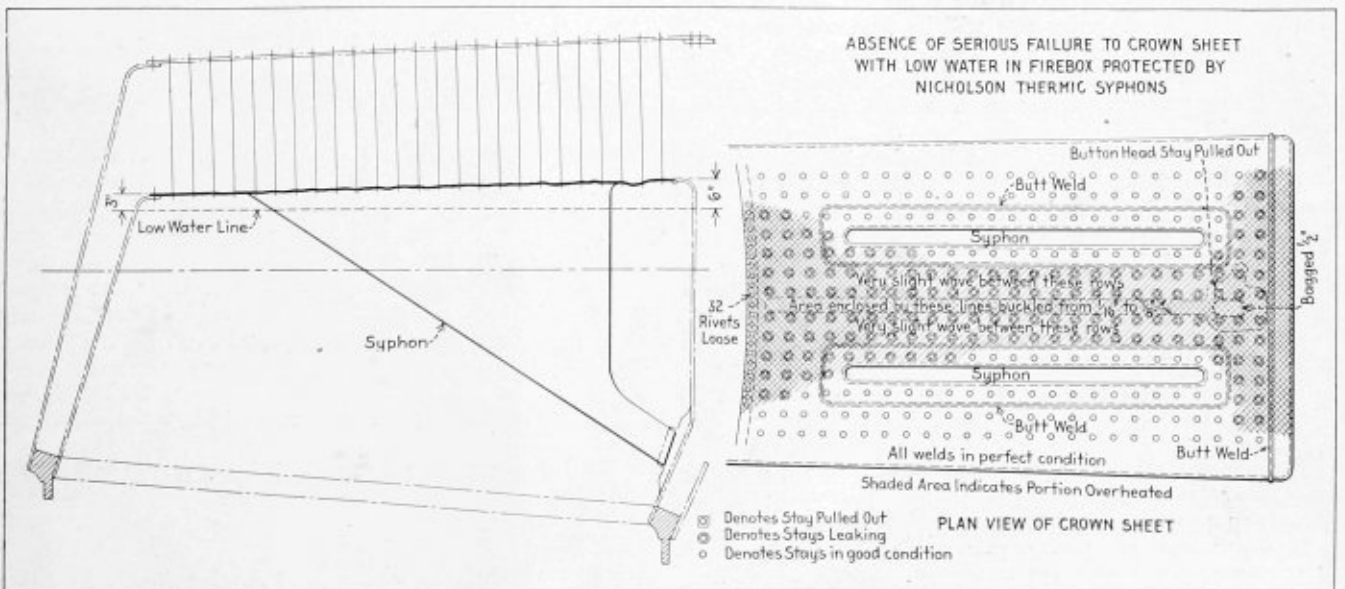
Diagram of Crown Sheet of Locomotive Equipped with Two Syphons Which Prevented a Disastrous Explosion Caused by Low Water
